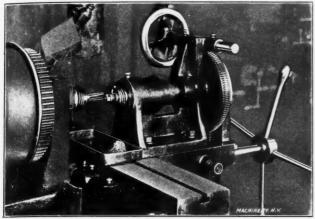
Milling Small Cams on a Machine equipped with Brown & Sharpe Cam Attachment
